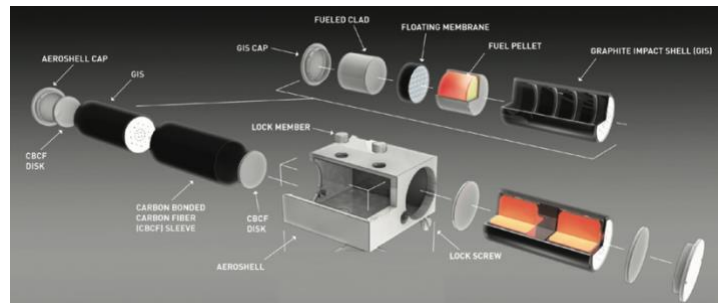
Exploded view of General Purpose Heat Source (GPHS) unit, showing how four individual fuel clads are assembled into the 250-W_{th} brick.
